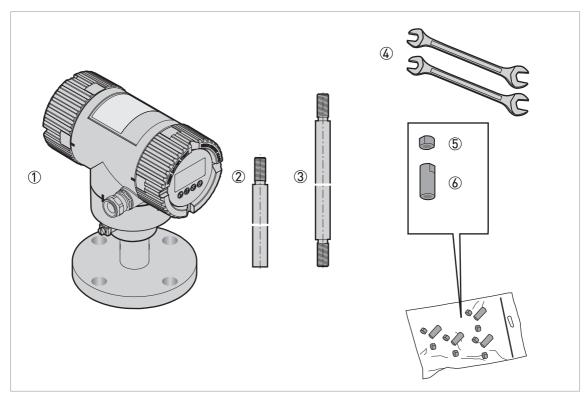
Equipment needed to assemble the single rod probe (segmented)
